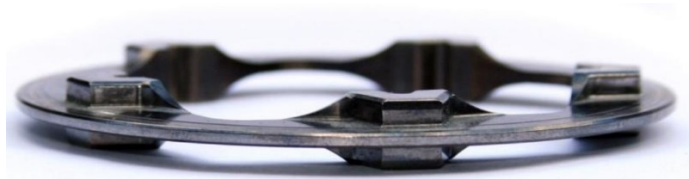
Sliding dog used in Formula 1 gearbox [22]
